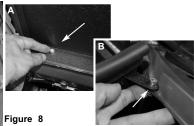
Figure A: secure bottom of heatshield using allen screw. Figure B: Secure the bracket using allen screw and m6
